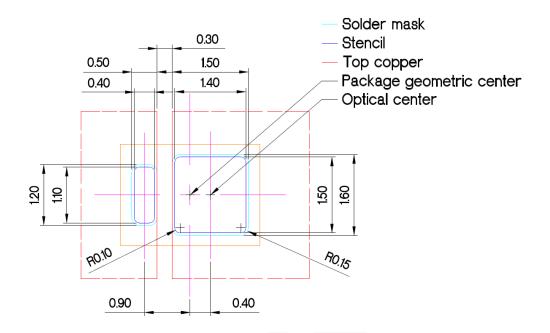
Recommended PCB solder pad layout for LUXEON IR 2720 Broadband.
